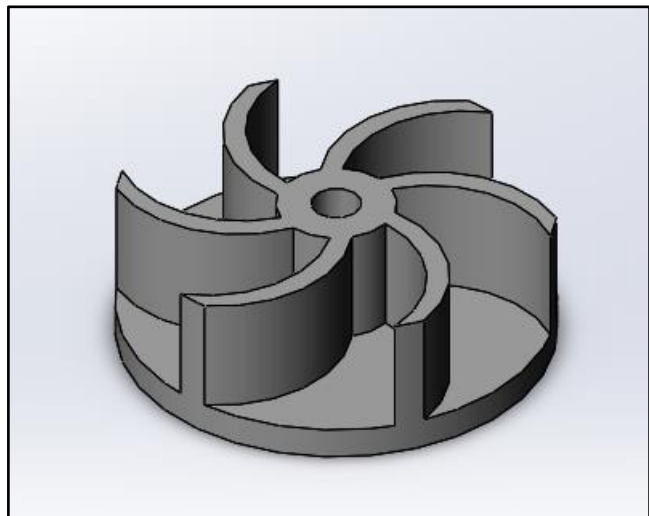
6 Forward-Facing Blade Impeller with 33 Degree Angle
